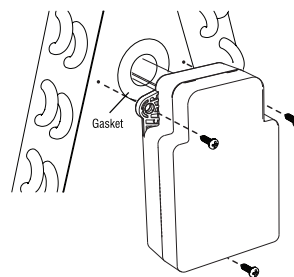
Insert assembly into delta plate knockout and secure with screws.
